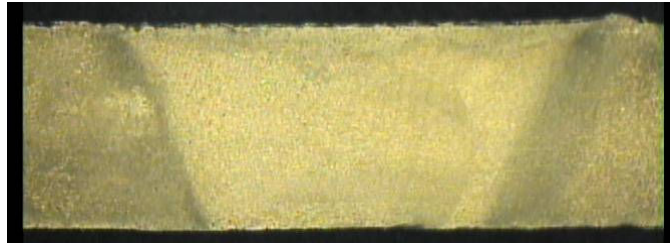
Marco section from  $\frac{1}{4}$  inch threaded tool, example 2.
